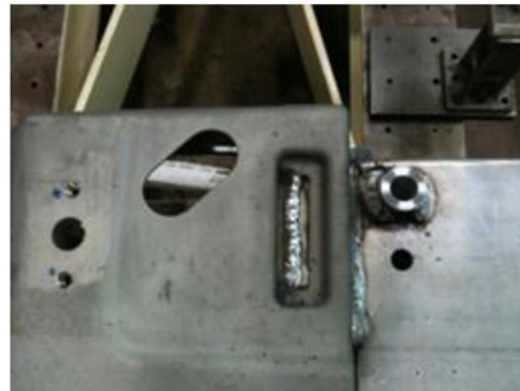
MMLV cast aluminum hinge pillar to cast aluminum extruded rail TIG weld.
